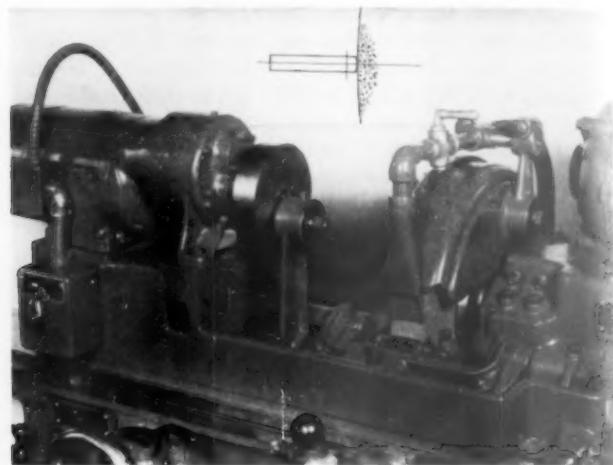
A fixture used to grind the edge radius of a pump vane.
